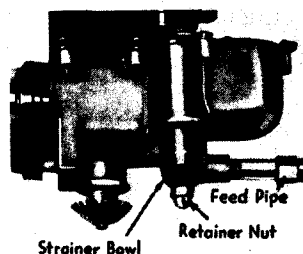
The strainer in the carburetor may be removed with the bowl by disconnecting the feed pipe and removing the retaining nut.
